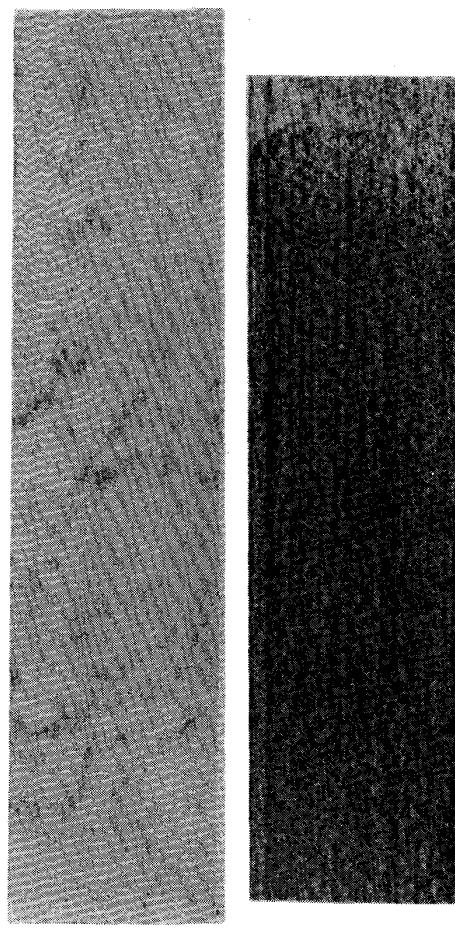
Residual coating of organic-silicate composite coated Ni-Zn plated sheet (EZN-UC) and Zicrometal (ZM) on tape after draw bead test.
